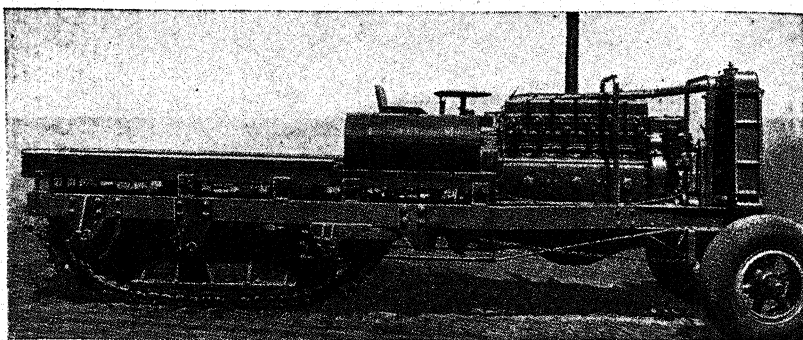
Modern log hauler which utilizes arc welded construction.
